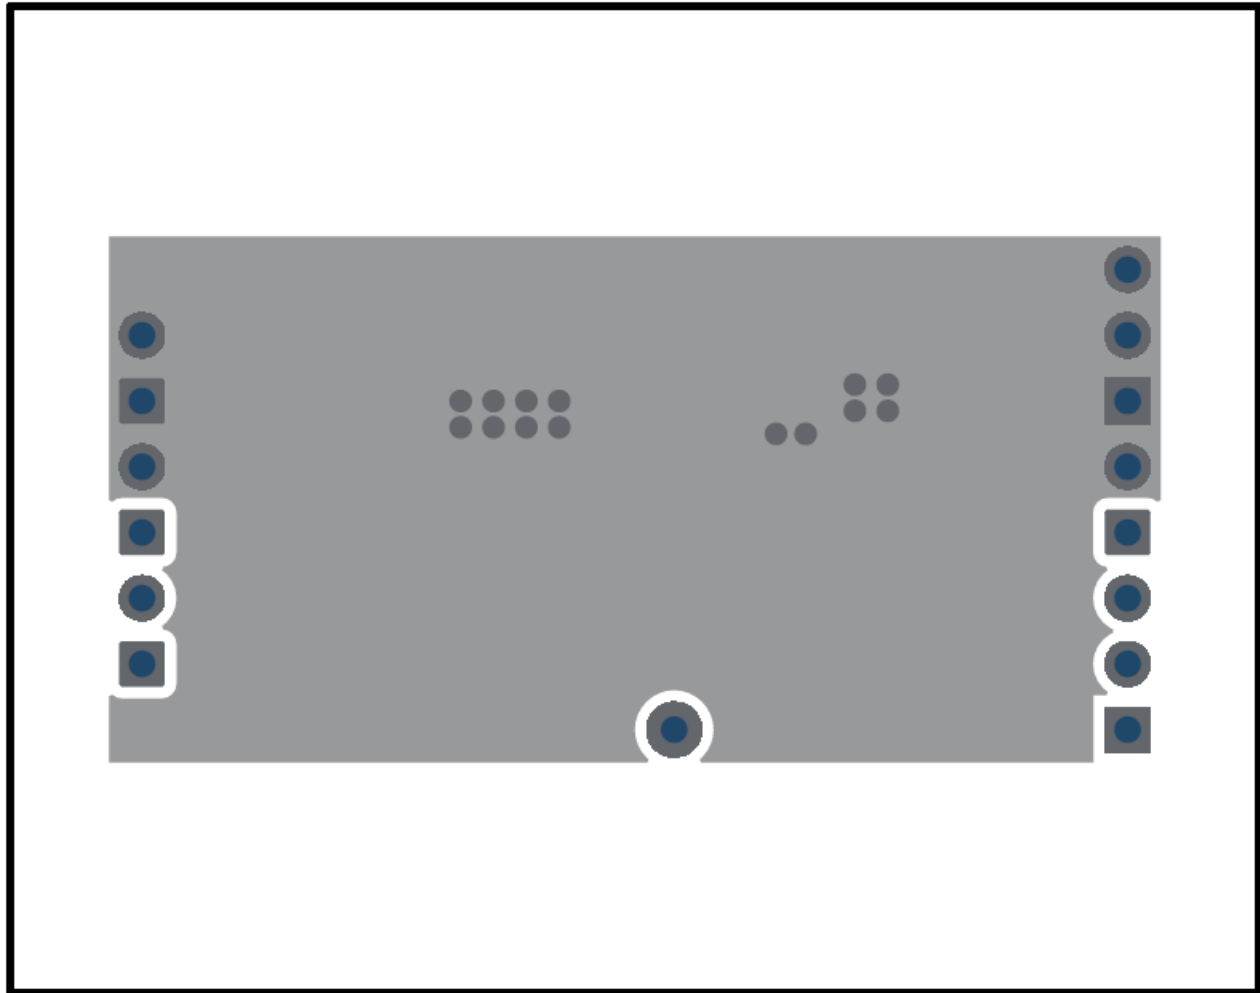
TPS61322EVM-001 Bottom-Side Layout
